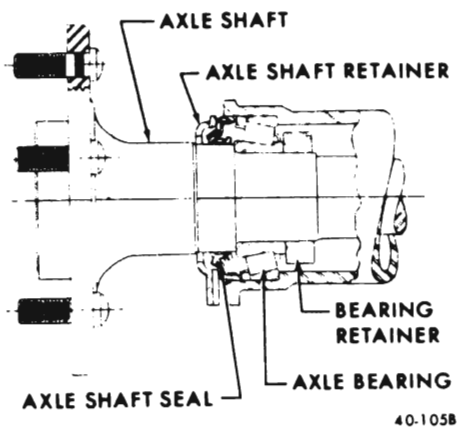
Rear Axle Shaft, Bearing and Seal (43-44000)
